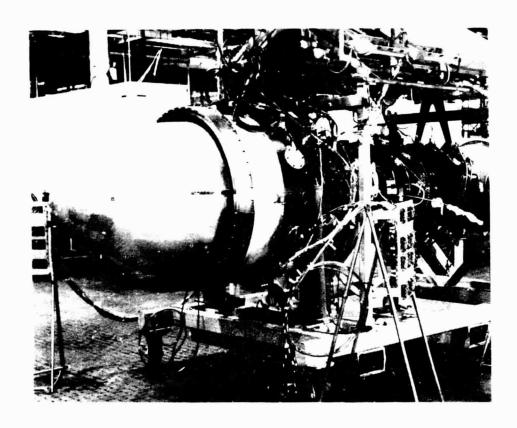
Assembled High-Pressure Compressor Rig Build 1
